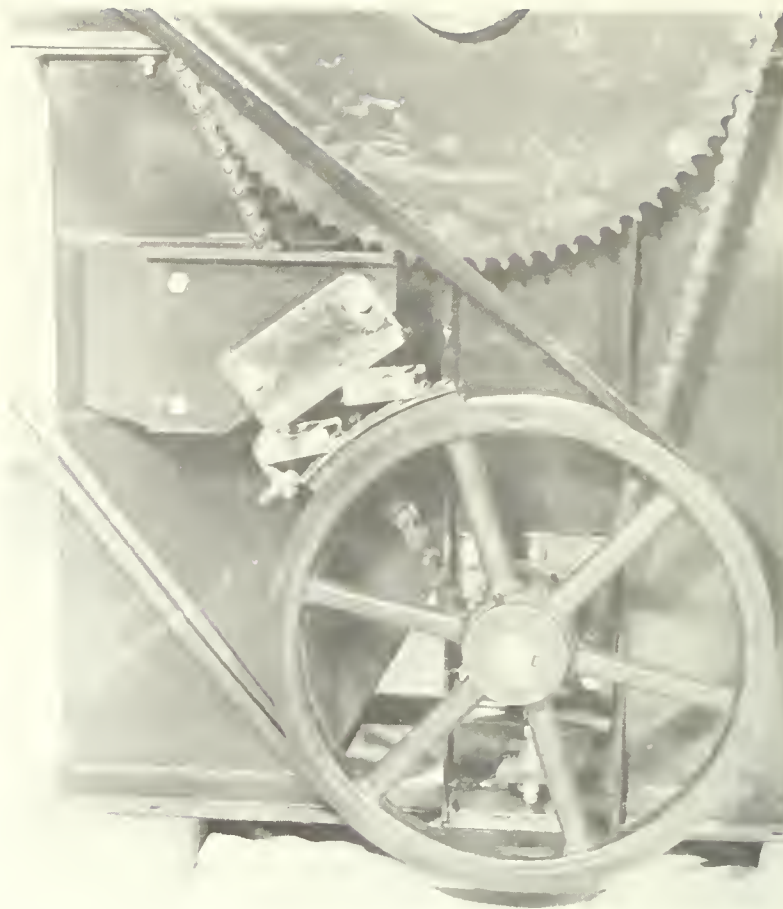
Anti-reversing brake. Courtesy: Clay Equipment Corp.
